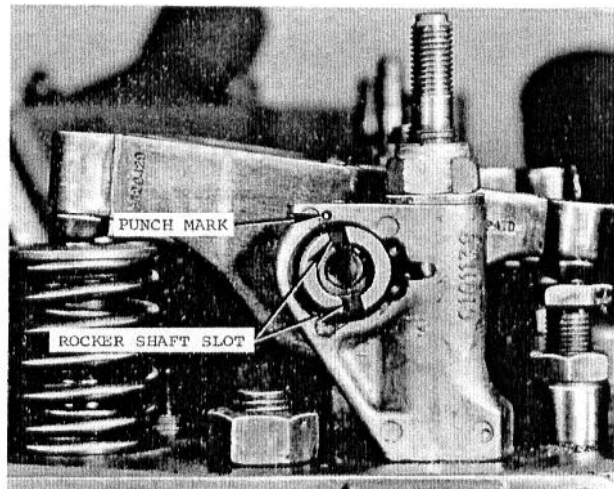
Rocker Arm Shaft Oil Slot Correctly Positioned
